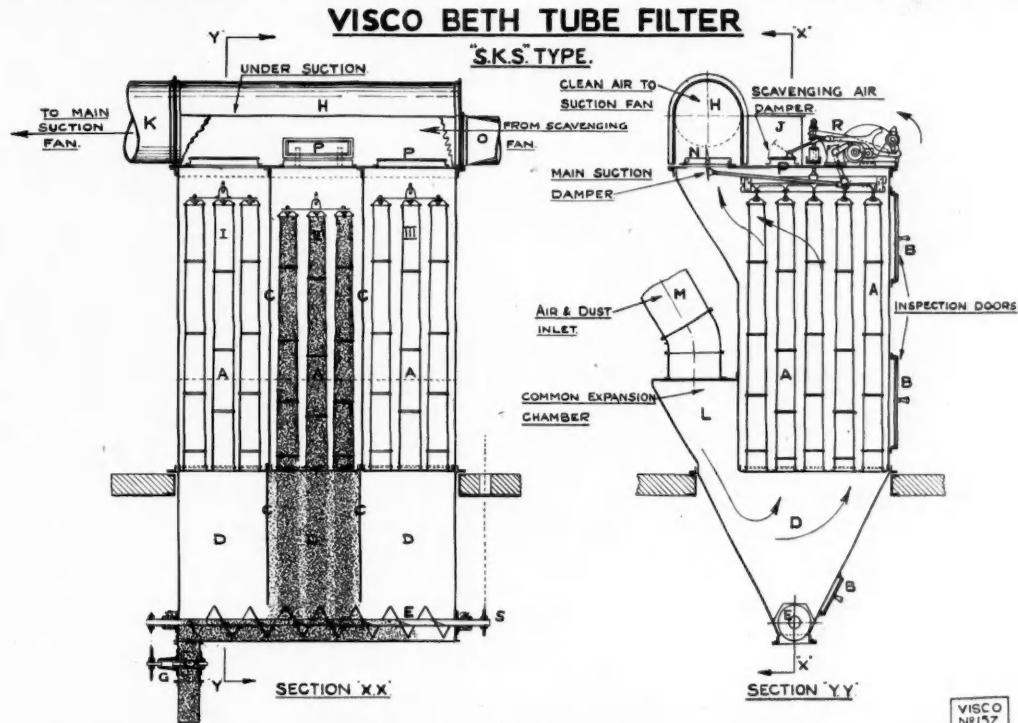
Sectional Drawing of a typical Suction Type Dust Collector with 45 Filter Tubes, grouped in three units of 15 tubes each.
